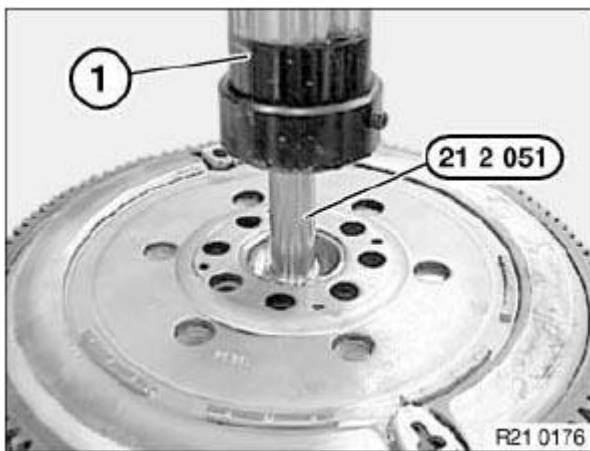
Hydraulic Press And Special Tool (21 2 051)
